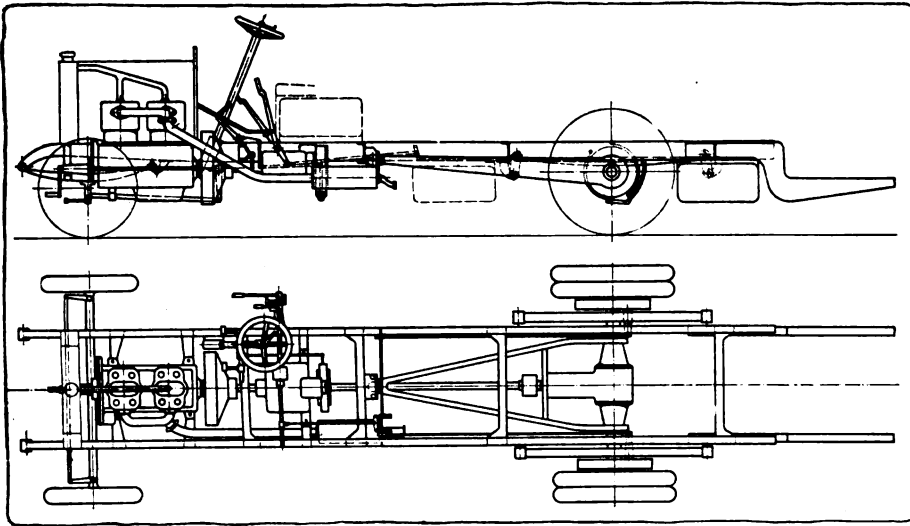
Outline views of NAG omnibuses with T-type, low-speed motor and compound spur and bevel gear in rear axle
